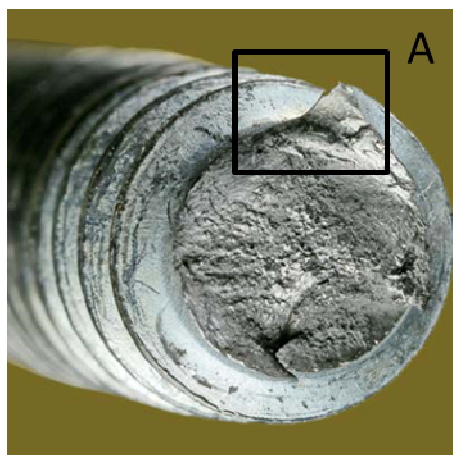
Shaft sleeve and the damage morphology of fasten bolt.
